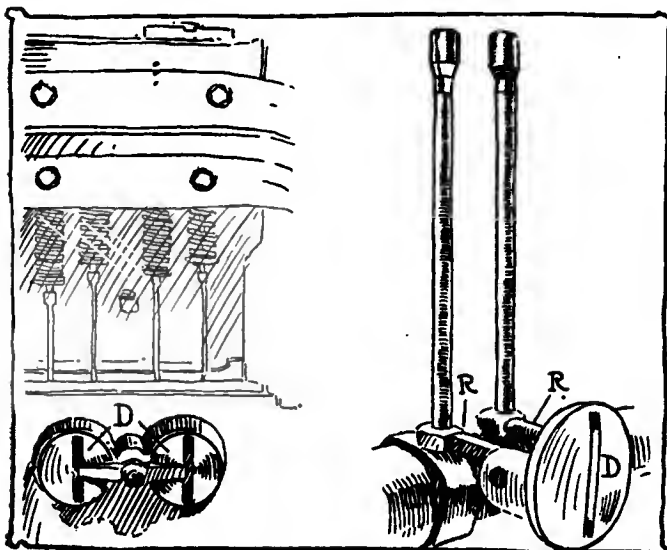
Use of easily removable rockers under valve stems of Panhard-Levassor motor
